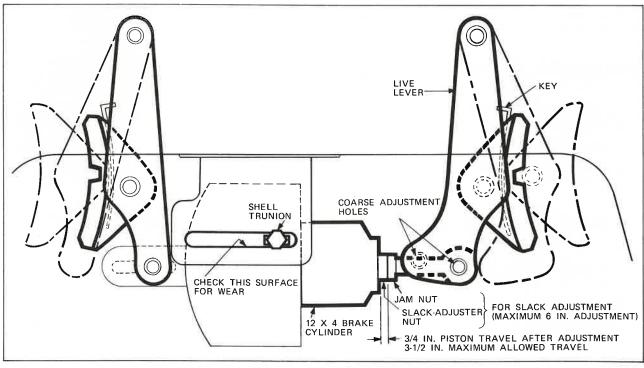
BRAKE-RIGGING ARRANGEMENT.
